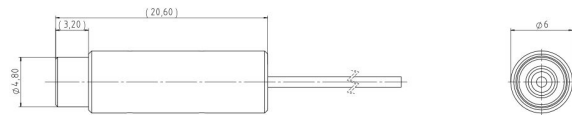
CAD drawing of the sensor head C03 (General tolerances: ISO 2768-fH).
